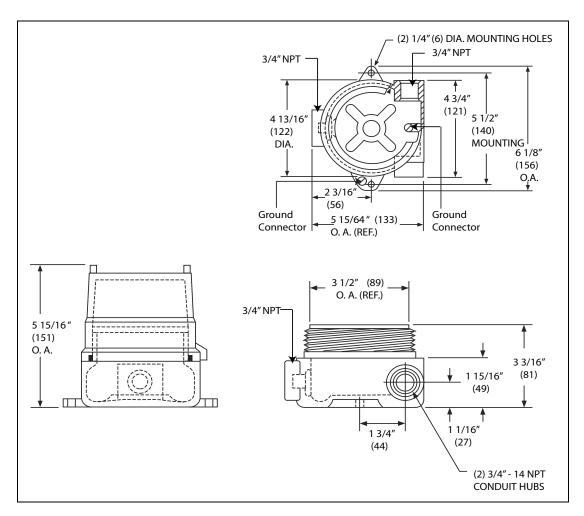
8410 Wireless Field Transceiver Dimensions
